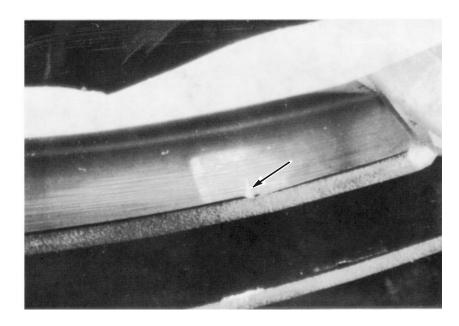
Inspection of Spiral Bevel Gear (Sheet 1 of 3)
